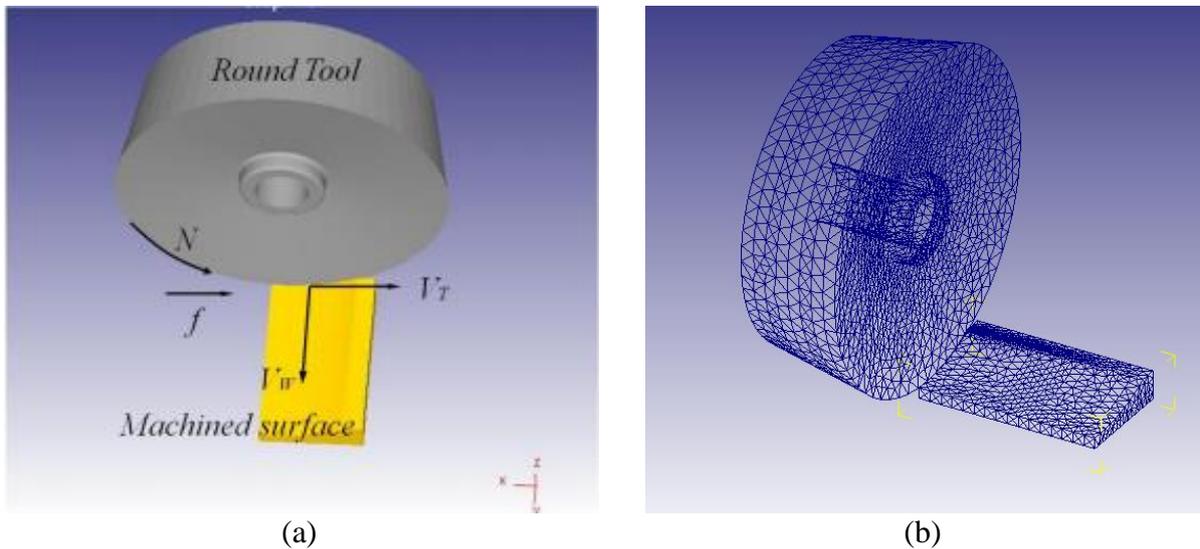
(a) Kinematic modeling of rotary tool, (b) Meshing of rotary tool turning
